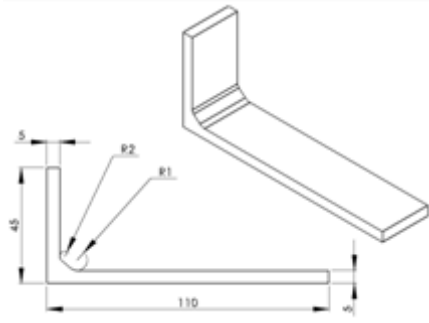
Simplification of the cruciform welded joint specimen
